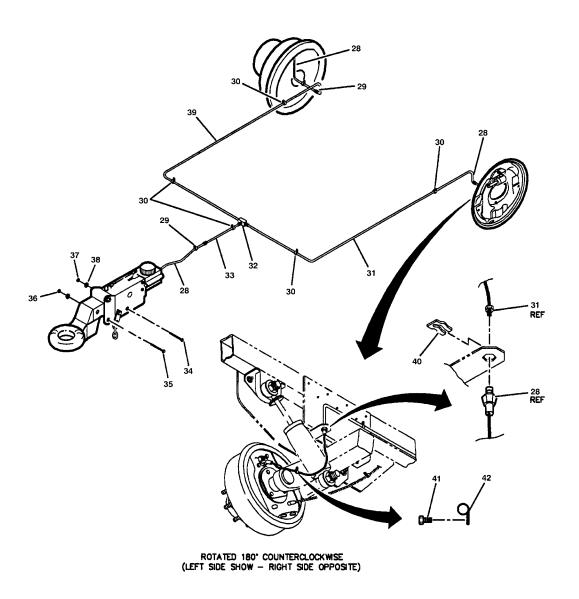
Brake Actuator Assembly (Sheet 2 of 2)
